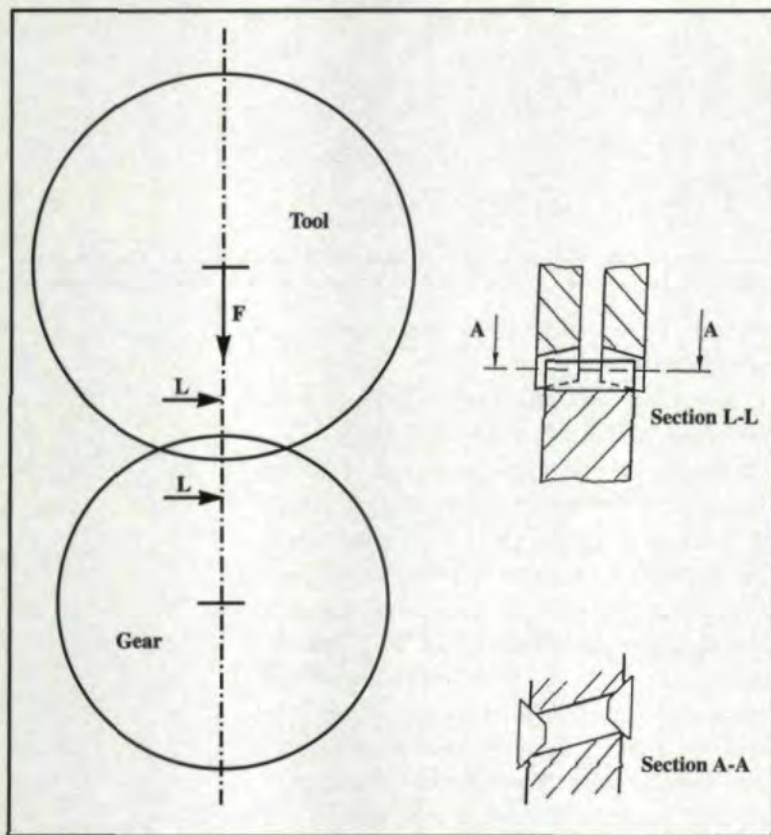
Schematic diagram of chamfer tool in mesh with gear.
